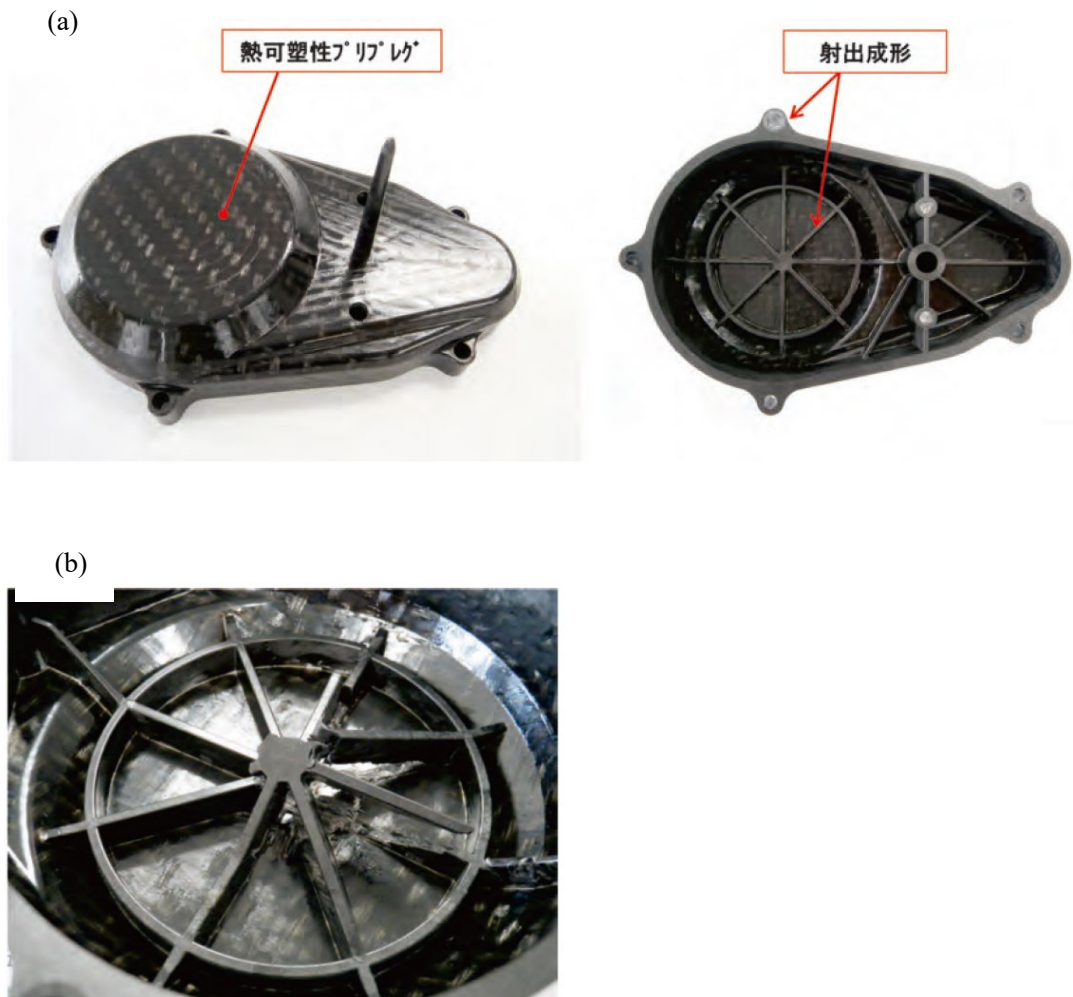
(a) Motorcycle scooter cover molding, (b) Molding after testing⁷⁵.
